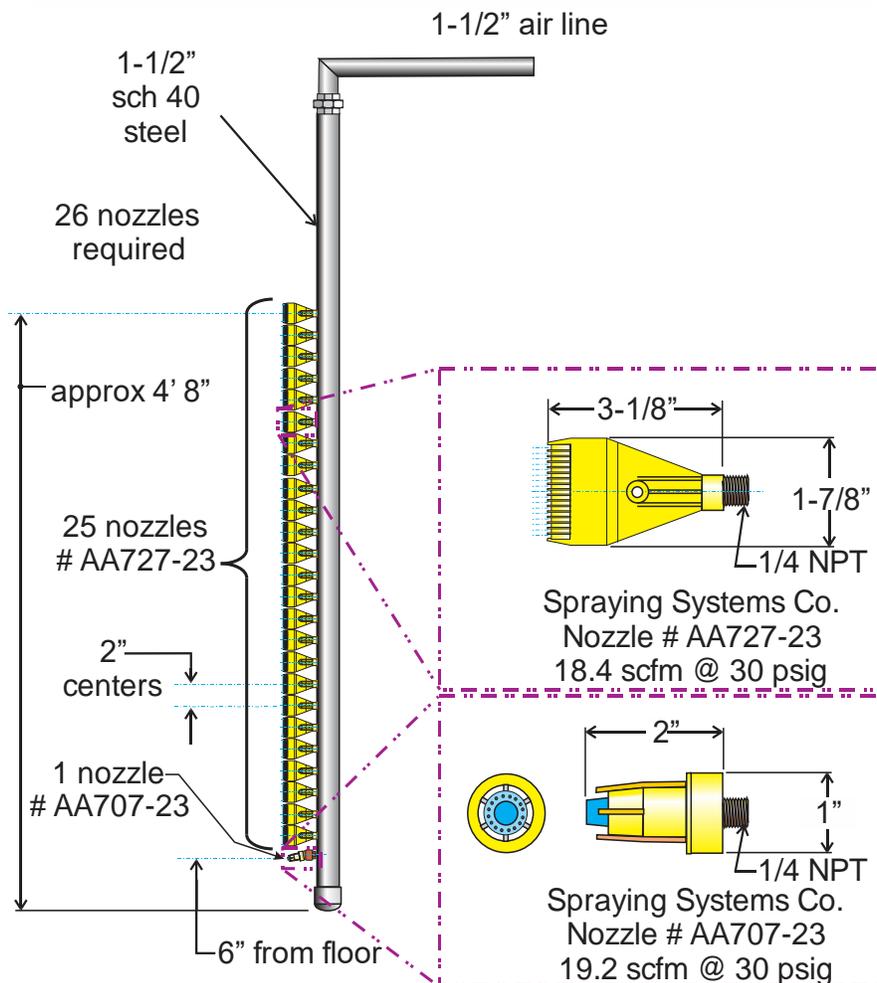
Air spray manifold design with 26 nozzles spaced two inches apart.
